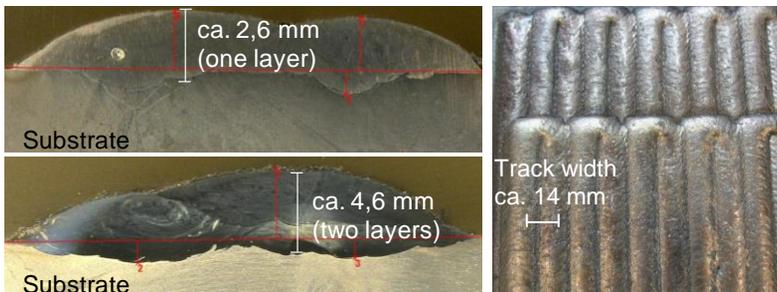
(a) Fig Cross sections of one layer and multilayer deposits; (b) top view of produced coating (Inconel 718 as powder material)
